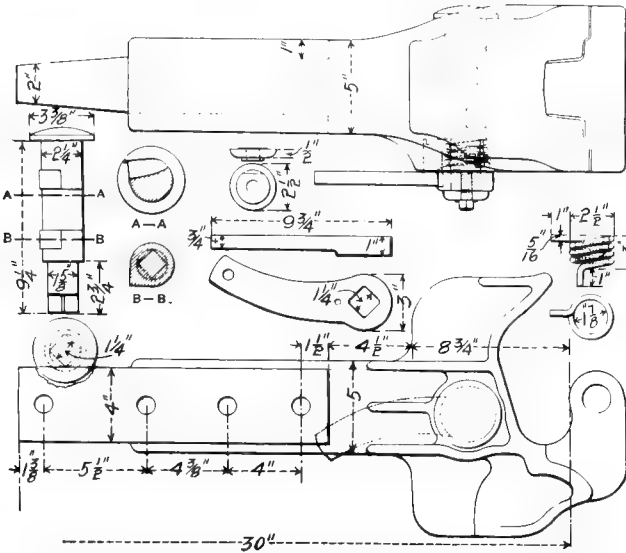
Standard Passenger Coupler and Parts. Standard Coupler Company.
